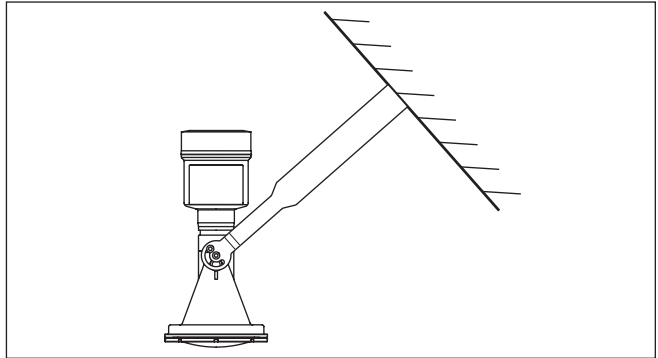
Wall mounting with inclined wall via the mounting strap with length 300 mm
